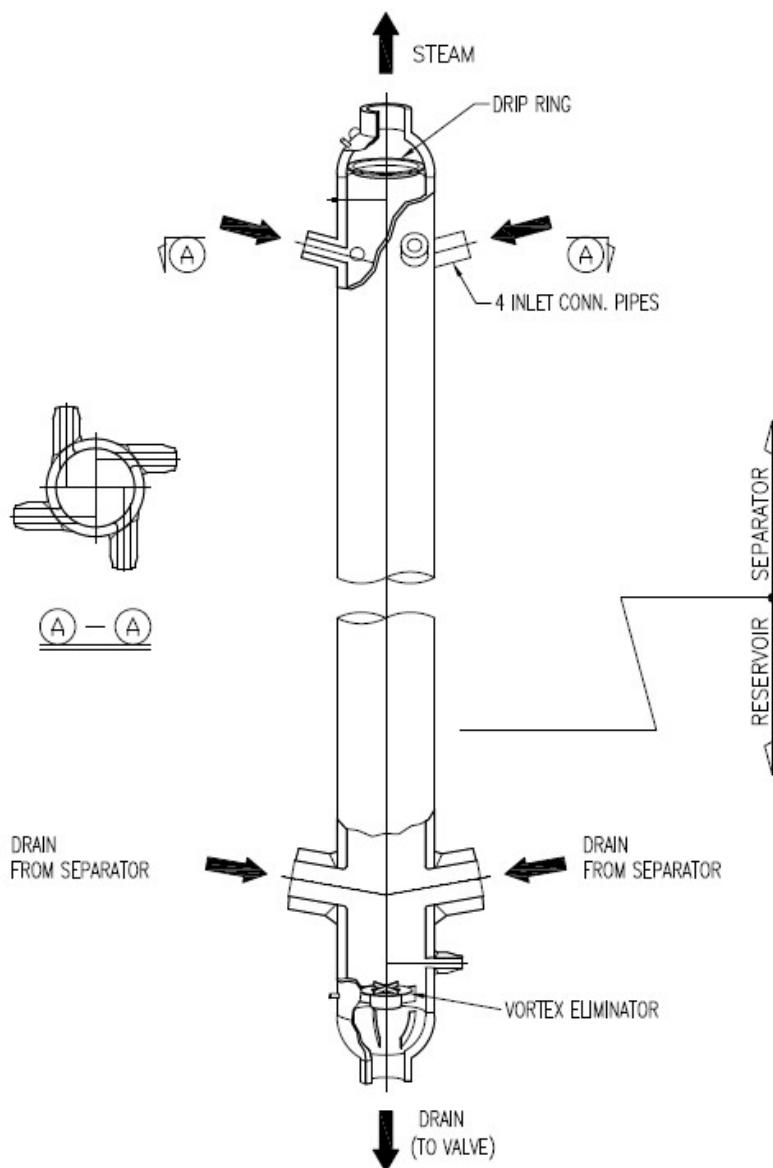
Arrangement of Separator Drain Tank
